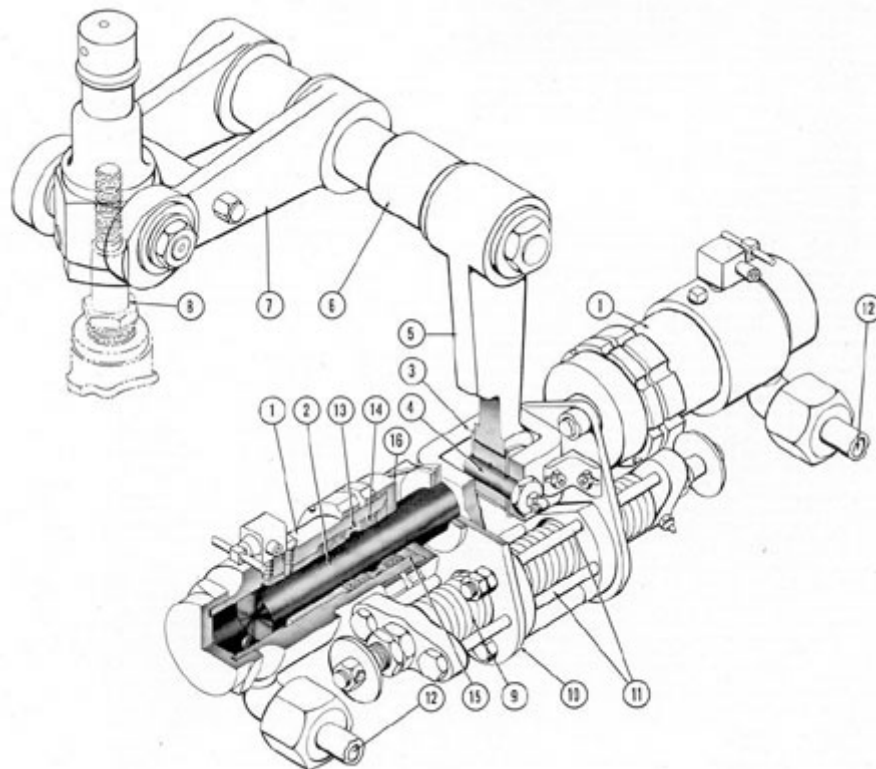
Cutaway of control cylinder assembly, with old-type centering spring.
